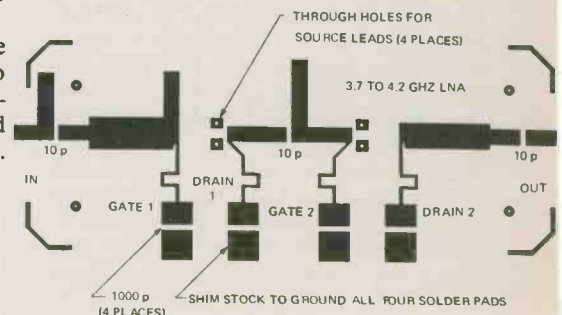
The printed circuit layout for the LNA, 1:1 size.
